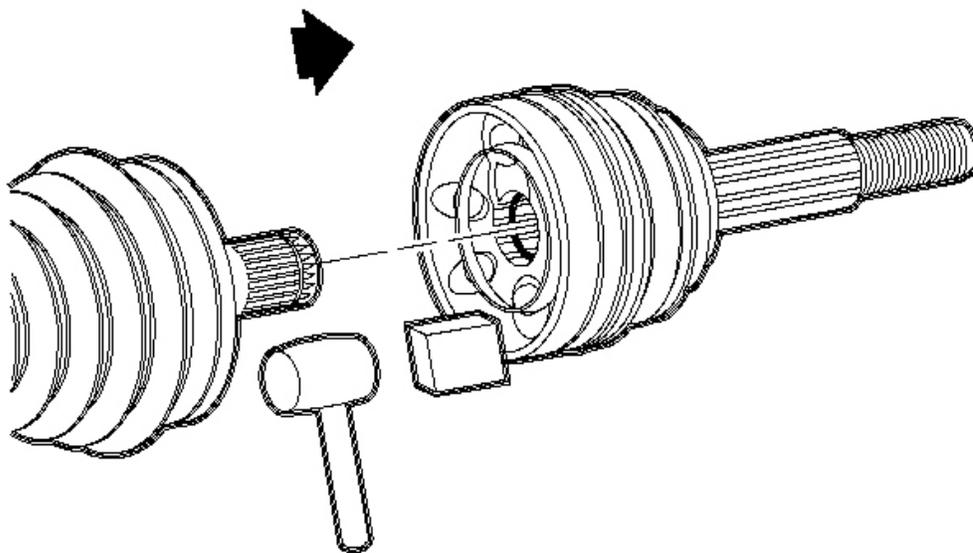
View Of Front Wheel Drive Shaft Inner Joint
